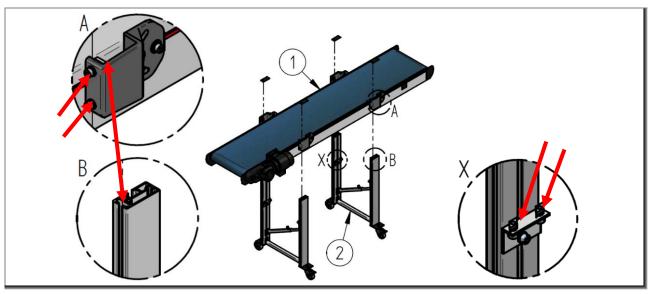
Assembly, conveyor with support AM 140 (typical)
